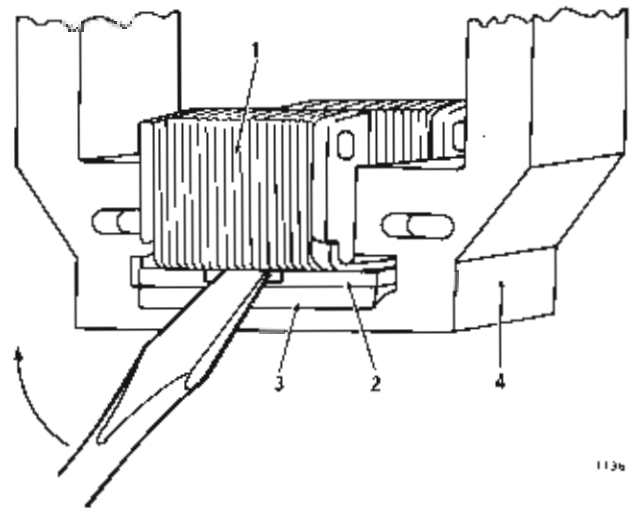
Removal of Magnet Yoke (Allen-Bradley Contactor)
